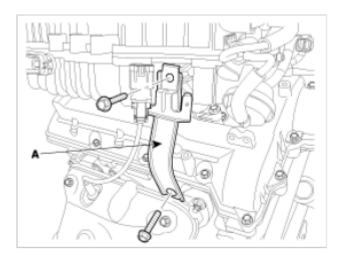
Locating Transaxle Mounting Bracket Courtesy of HYUNDAI MOTOR CO.
